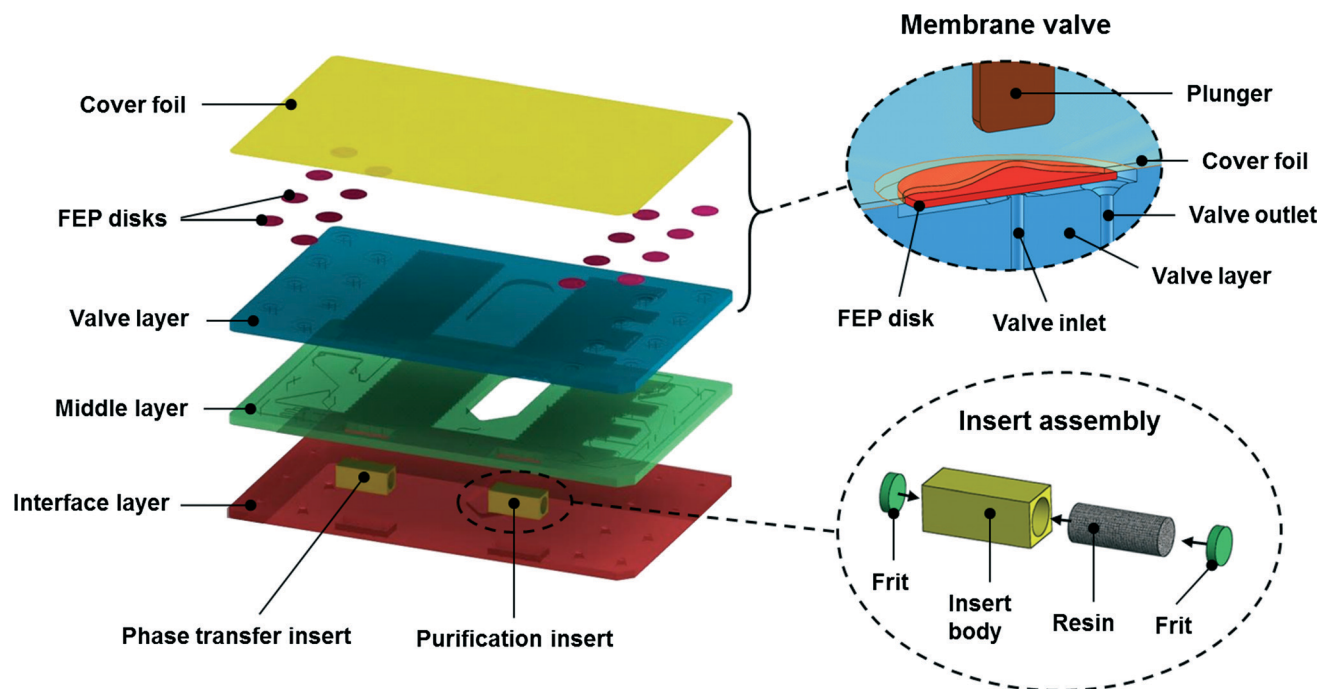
Schematic of microfluidic chip assembly including the membrane valve and the insert assembly.
